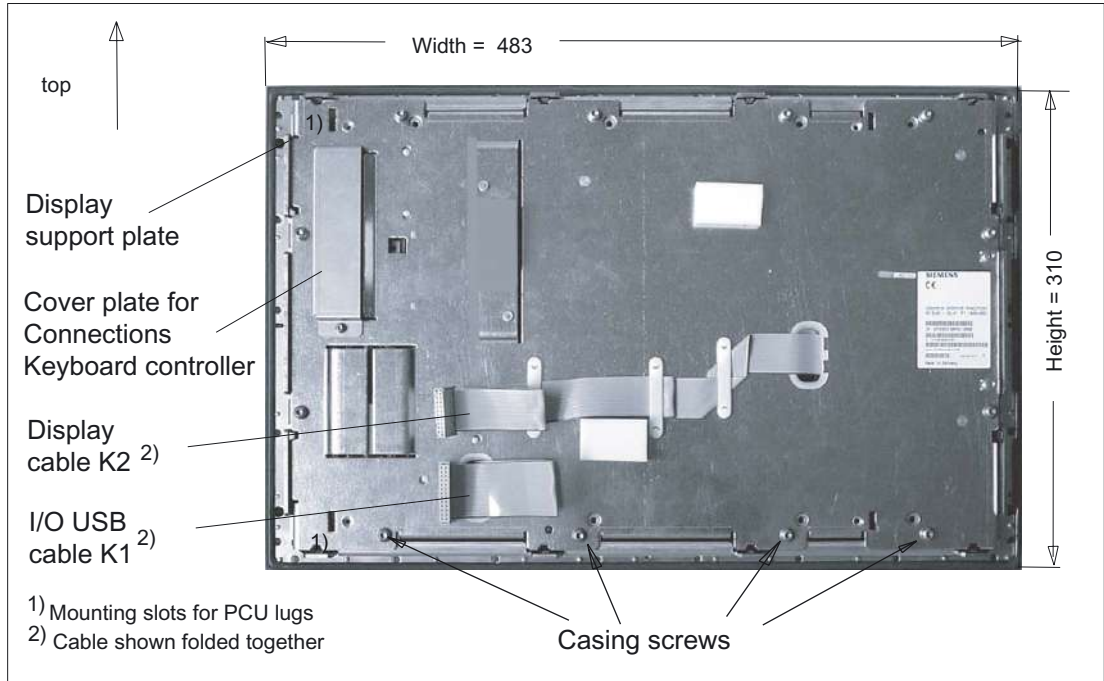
Rear side of operator panel front with position of interfaces and mounting slots
